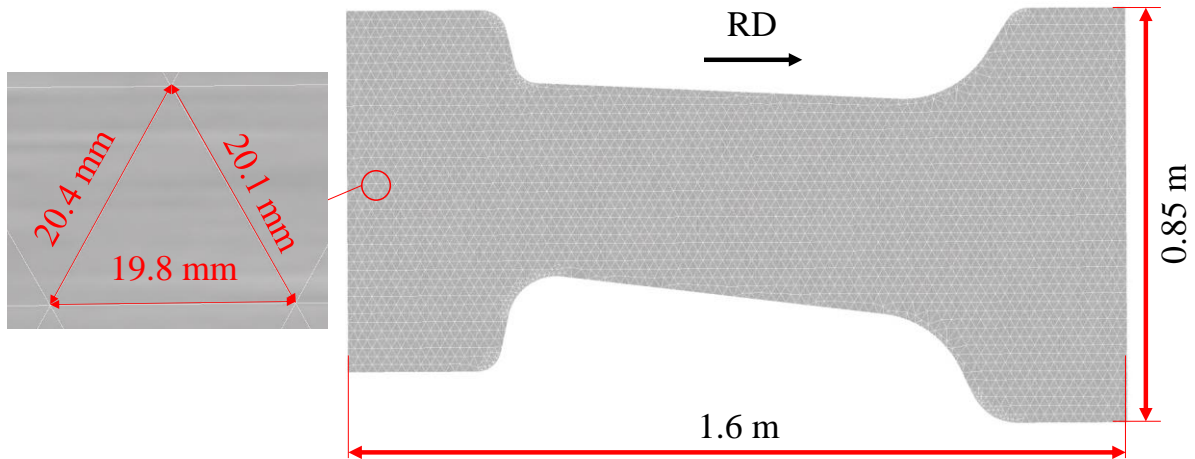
General dimensions and initial mesh of the blank before the B-pillar is formed
